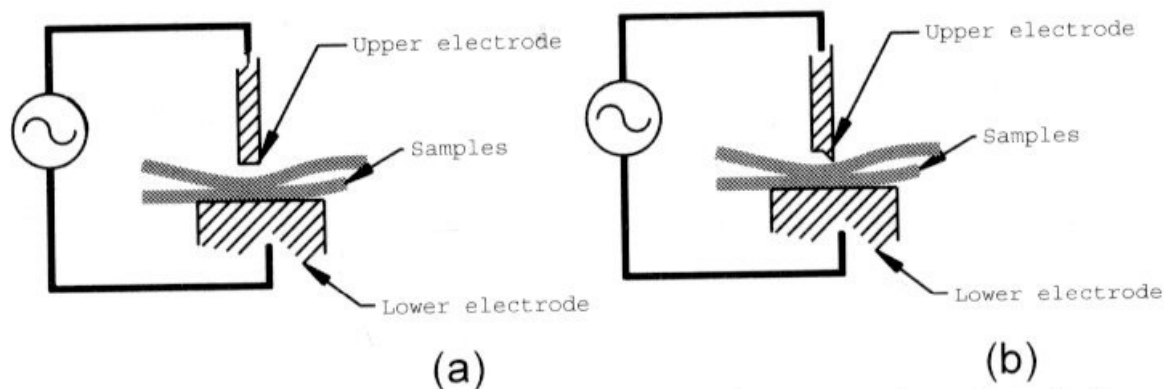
Typical electrode configuration for (a) welding and (b) cutting and sealing
